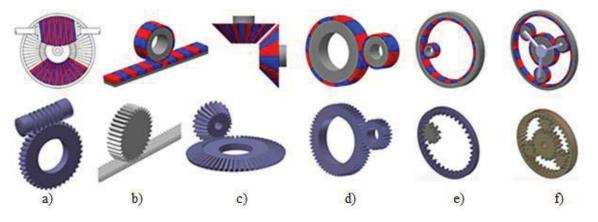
Comparative view of magnetic and mechanical gear transmissions [30]
